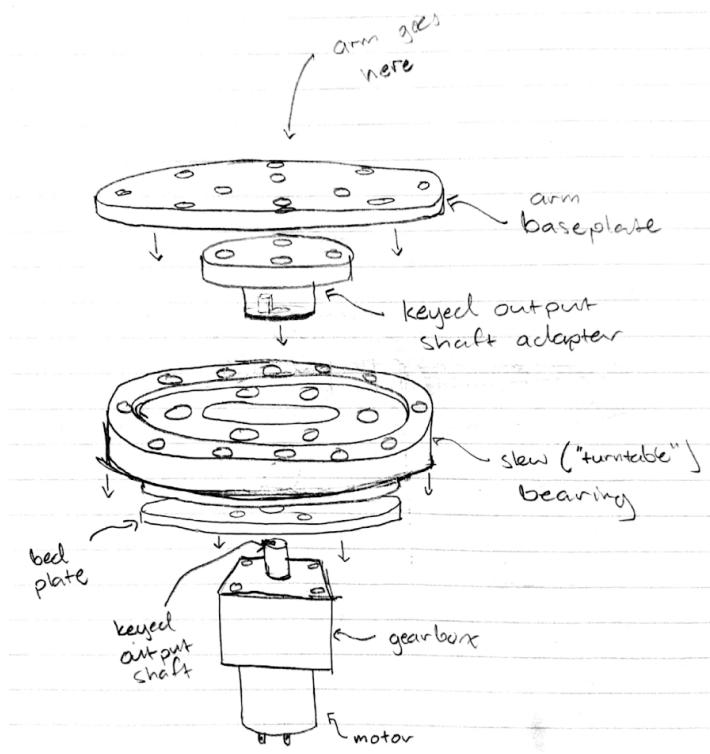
Directly Driven Turret with Gearbox Reduction
